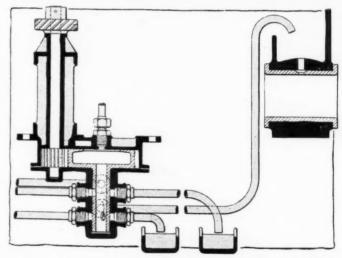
Combined oil and distributing valve used by the Woiseley Tool and Motor Car Co. In its lubricating system. This is located in the crankcase and acts as shown
